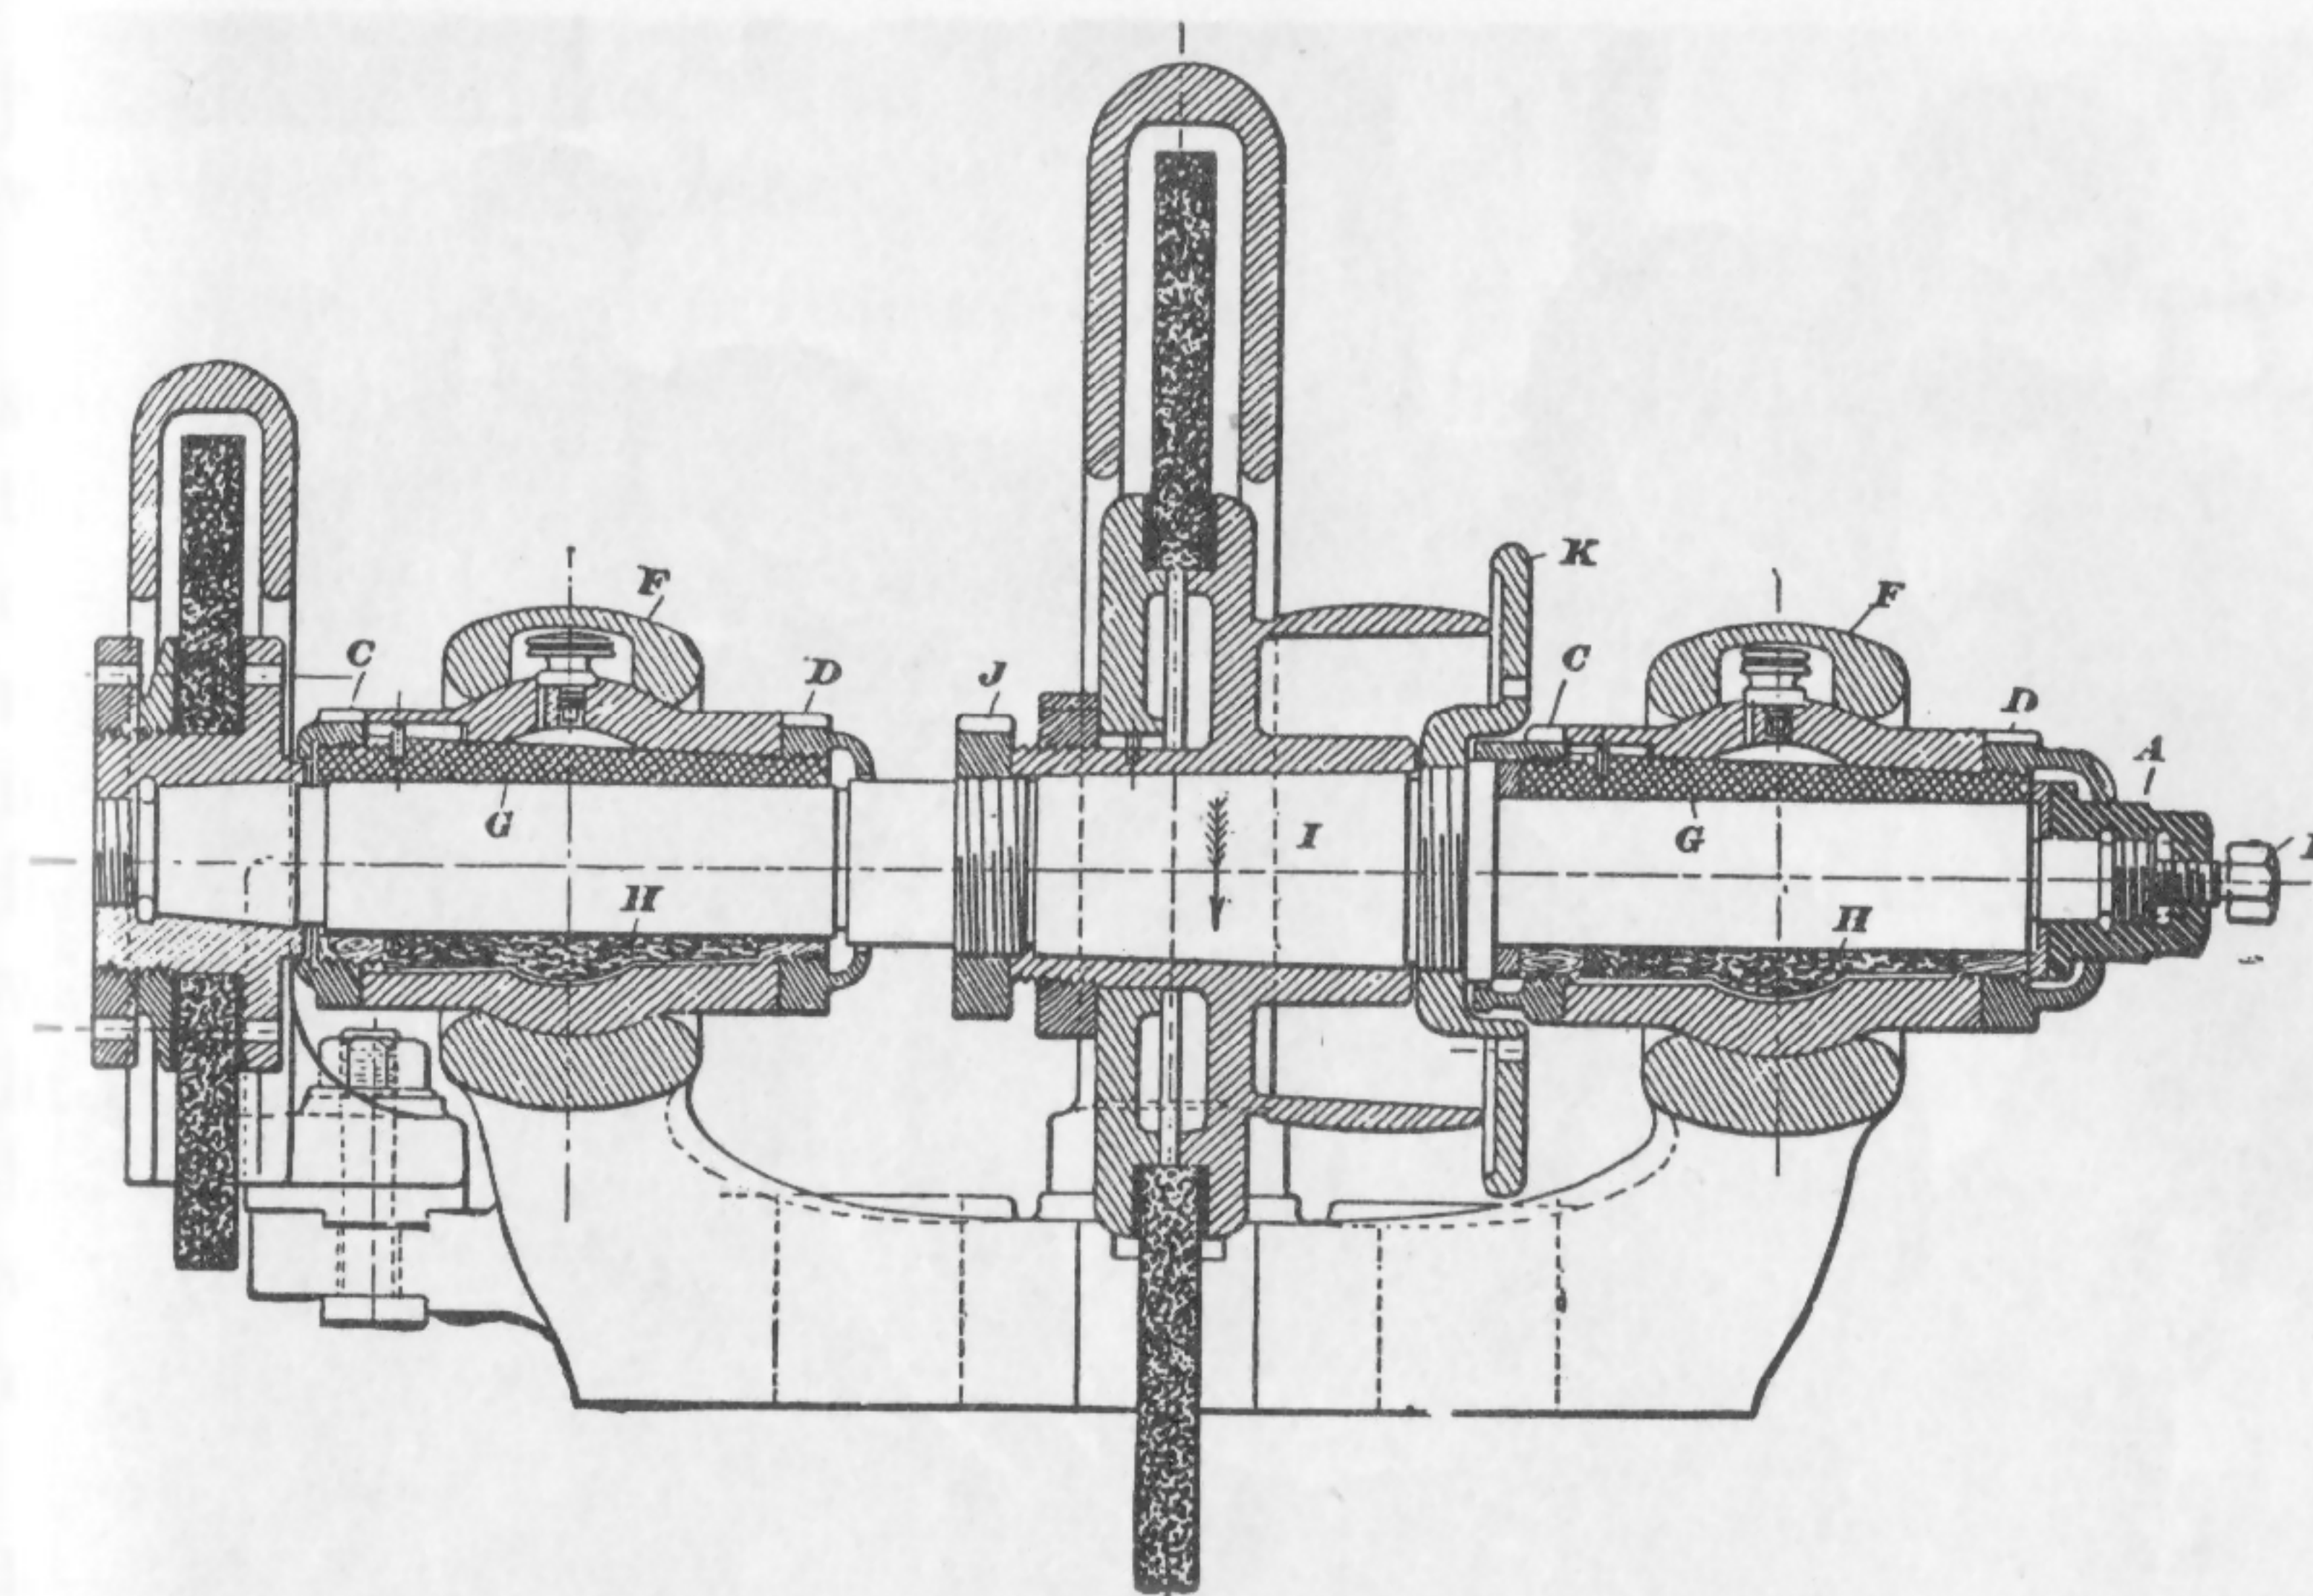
WHEEL MOUNTING AND WHEEL GUARDS, 1891 (Brown & Sharpe)
